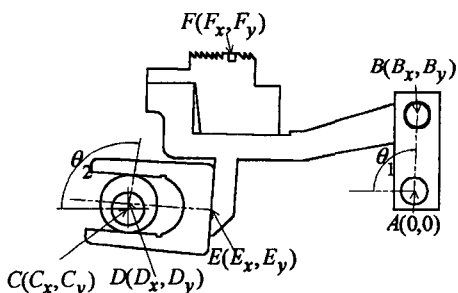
Transfer mechanism of industrial needle driven sewing machine
